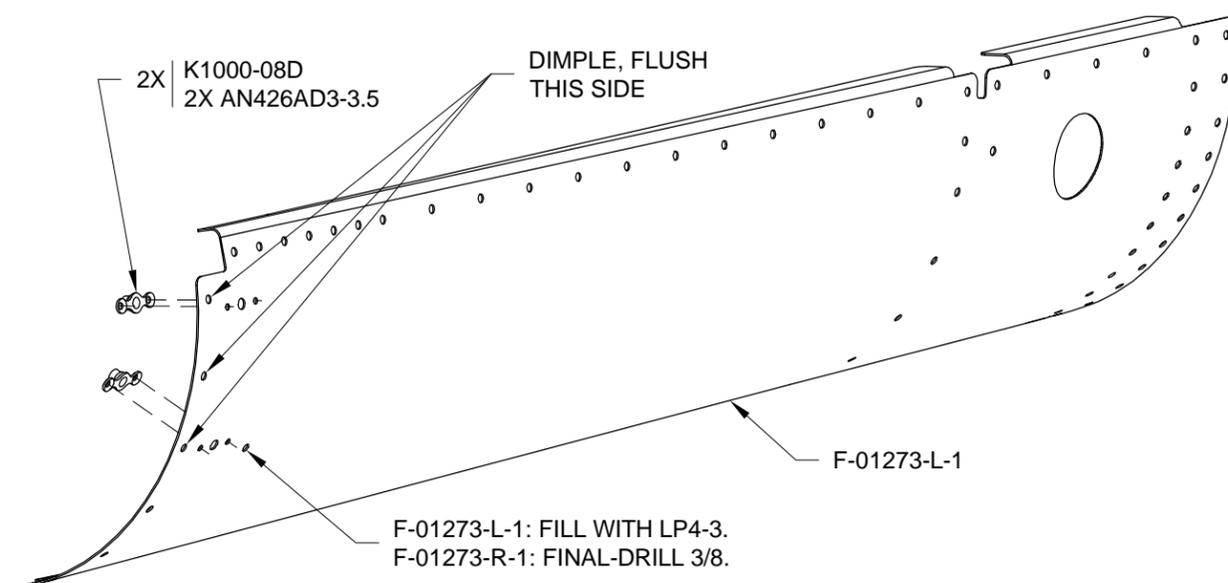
PREPARING THE BAGGAGE CORNER SKINS
